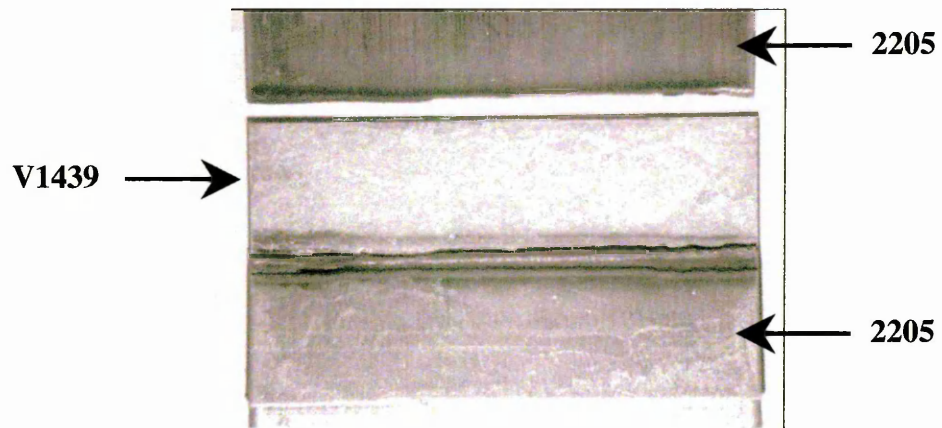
Shows a fatigue specimen in which fatigue failure occurred in the 2205
